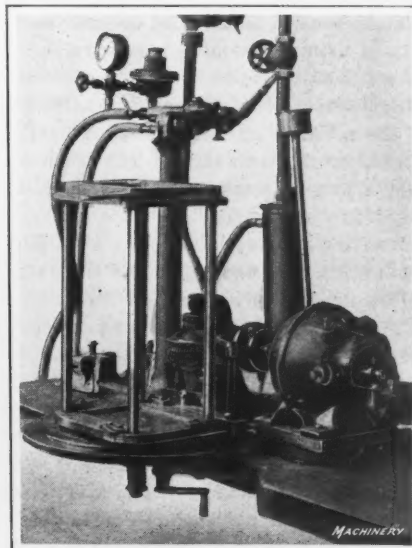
Special Machine developed by Edison Storage Battery Co. for welding Top and Bottom into Battery Containers
